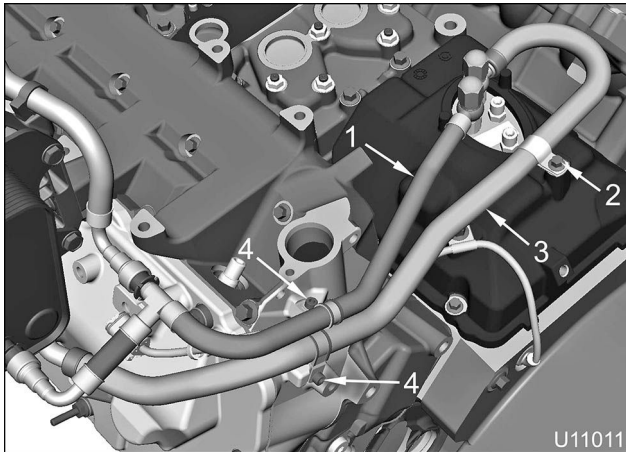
Oil Level Tube Assembly and Coolant Return Hose
